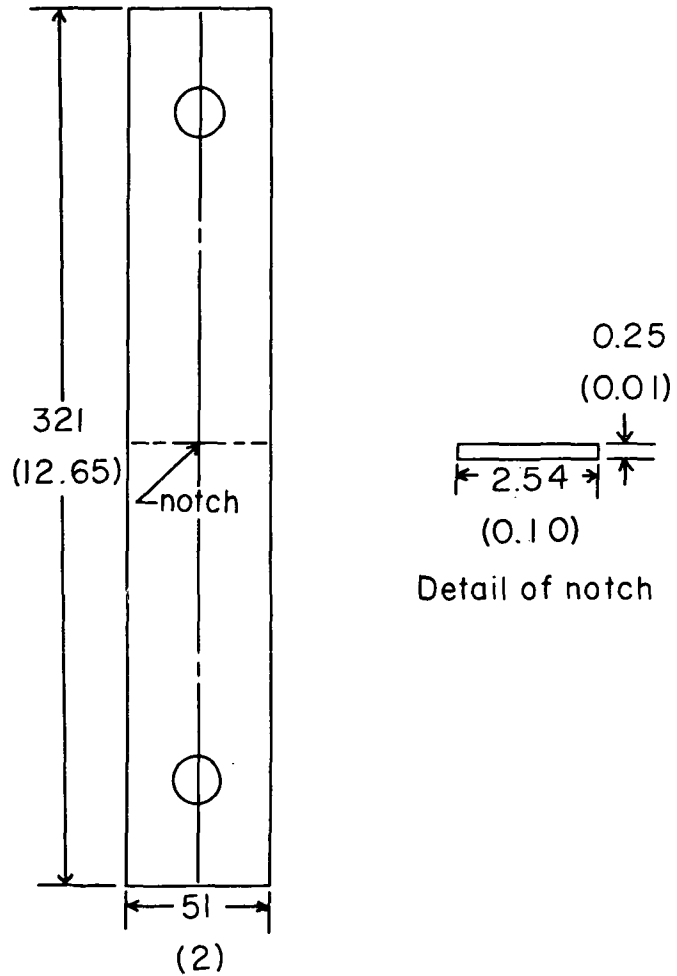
Configuration of the fatigue-crack-propagation and fracture toughness specimens. Material thickness was 2.3 mm (0.090 in.). Dimensions are in mm (in.).
